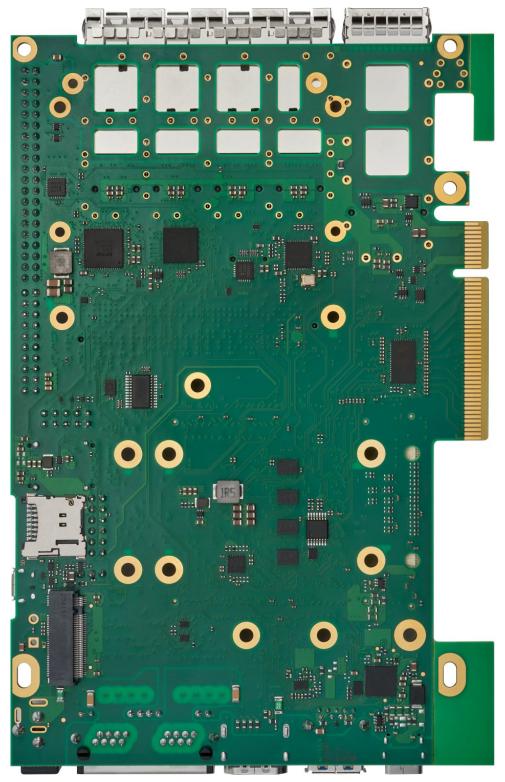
Board Bottom View ME-PE3-4S-C-R1.0 with 4 ×SFP+ Connectors
